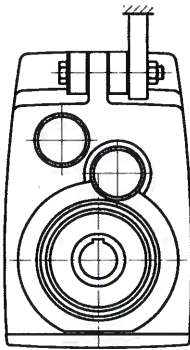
Mounting the rubber buffer (Option G or VG) on parallel shaft gear units
